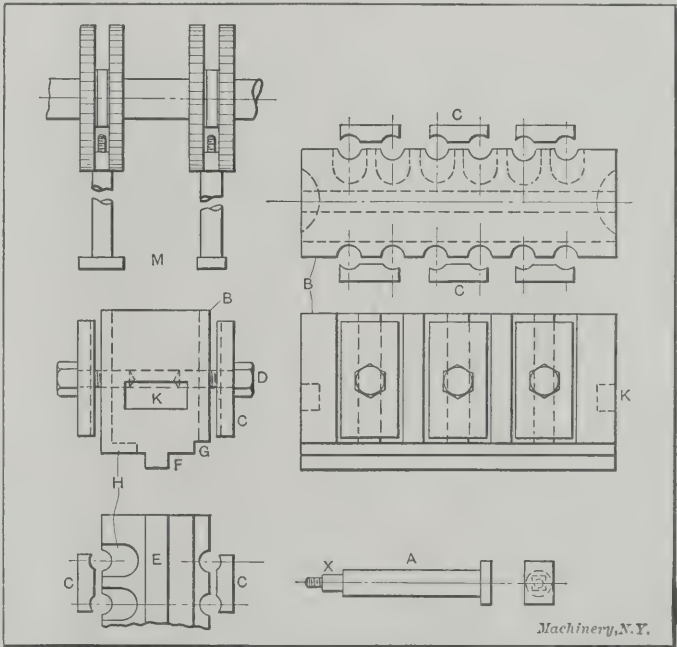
Fixture for Milling Square X on Bolts A in Correct Relation with Rectangular Heads
